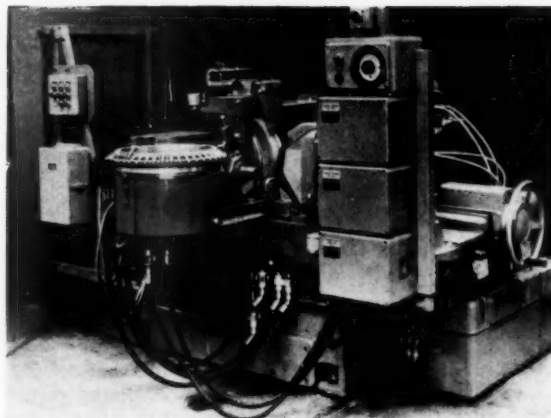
Scrivener No. 2 controlled-cycle centreless with fully automatic equipment for grinding ball pins
